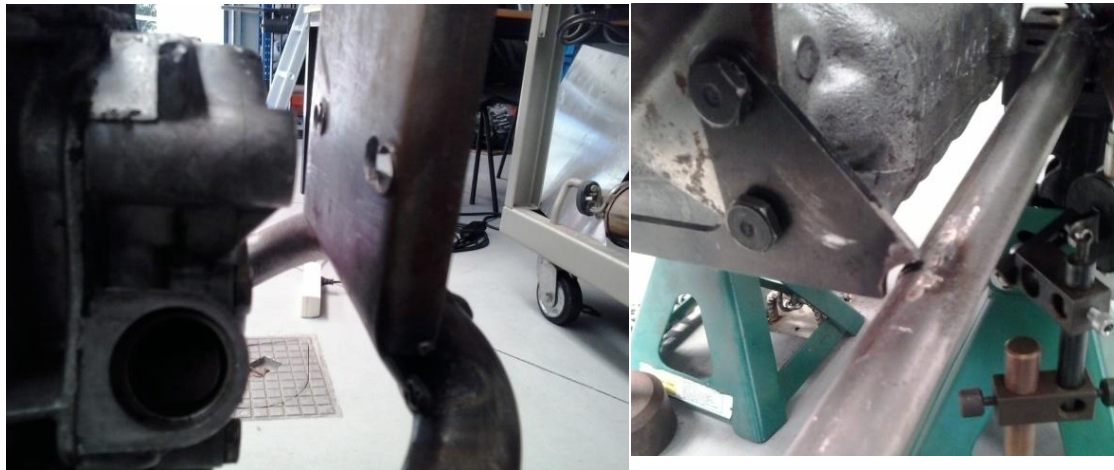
Engine mounts that were either not welded or not bolted
